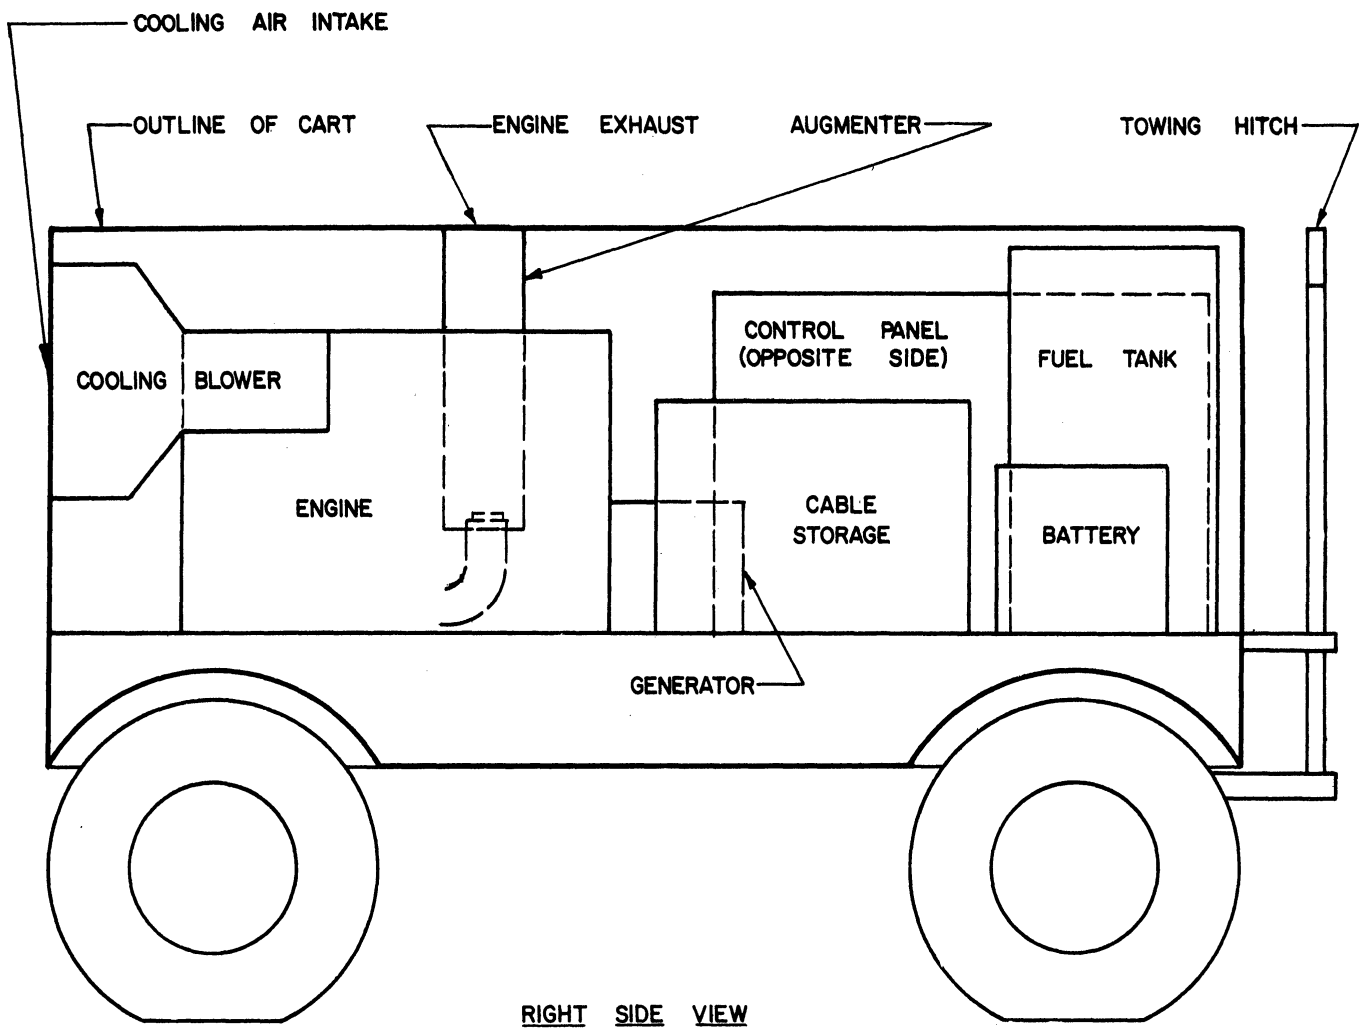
Schematic elevation of A-1 interior arrangement.
